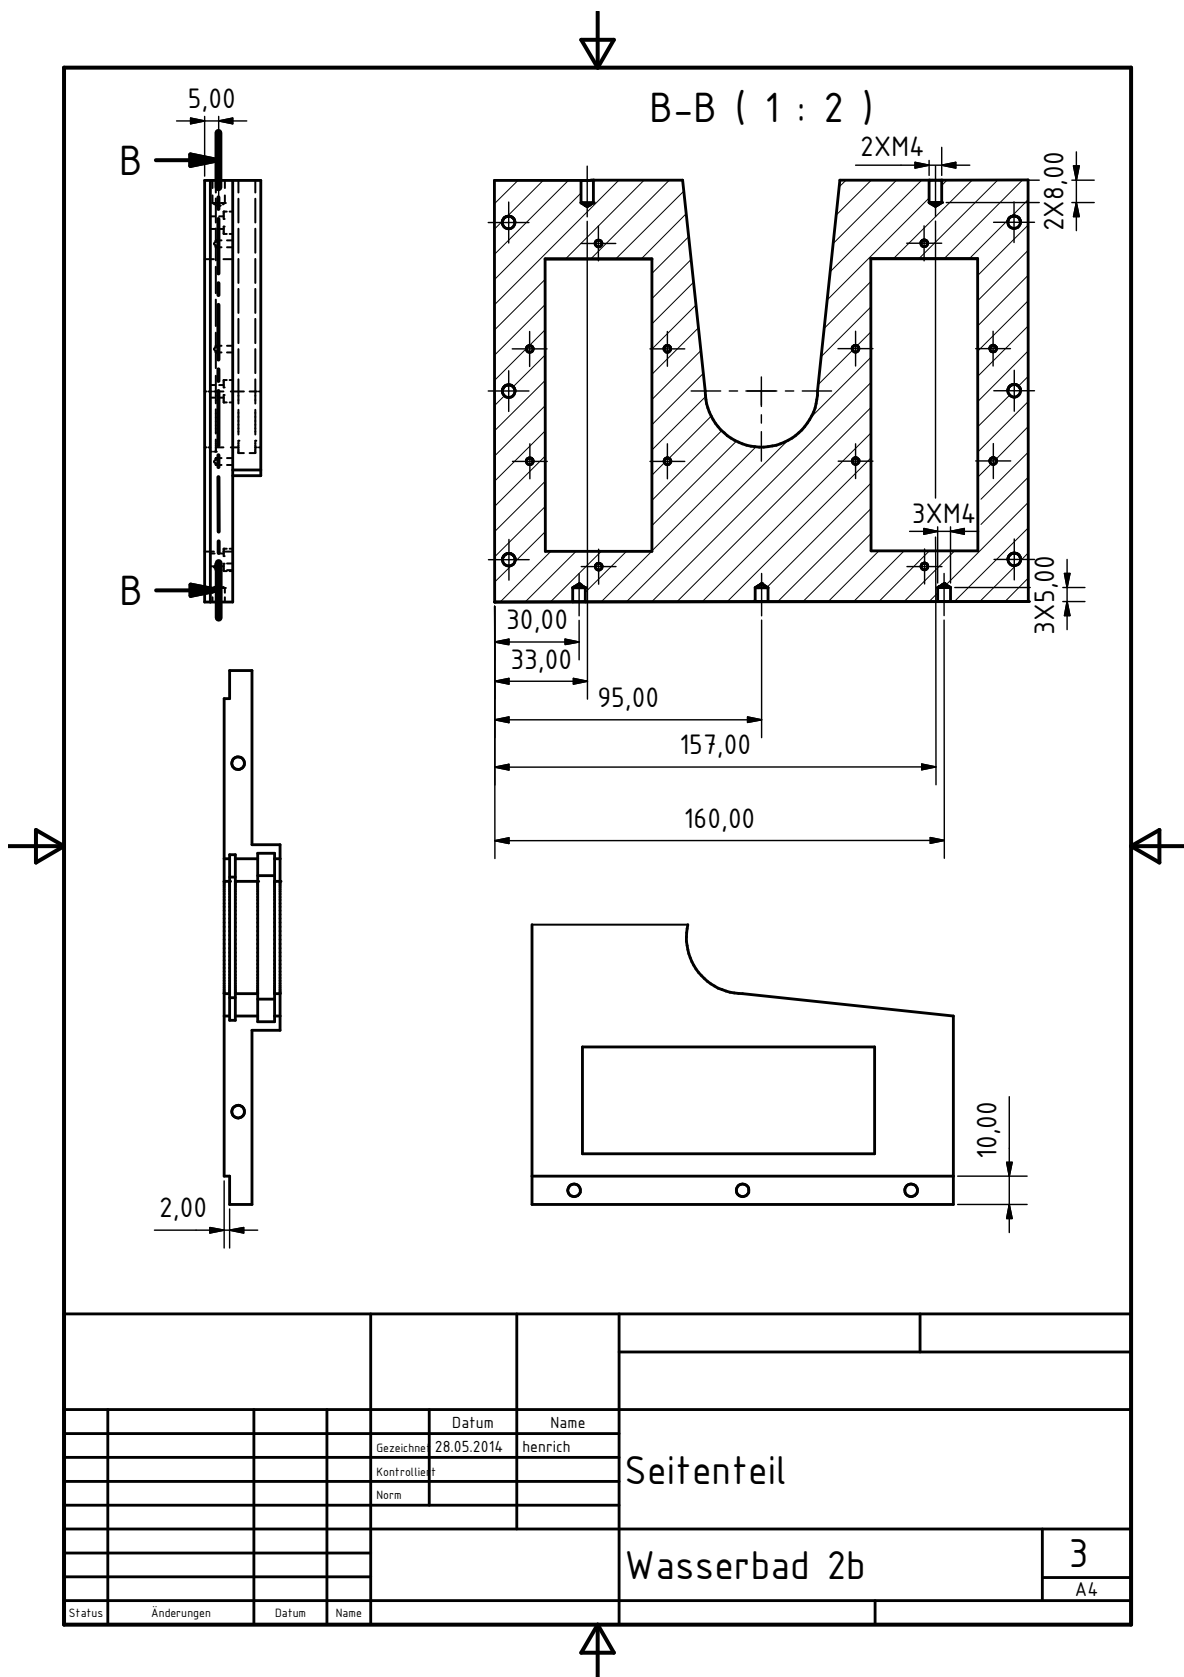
Technical drawing of the liquid container right and left.- part 3
